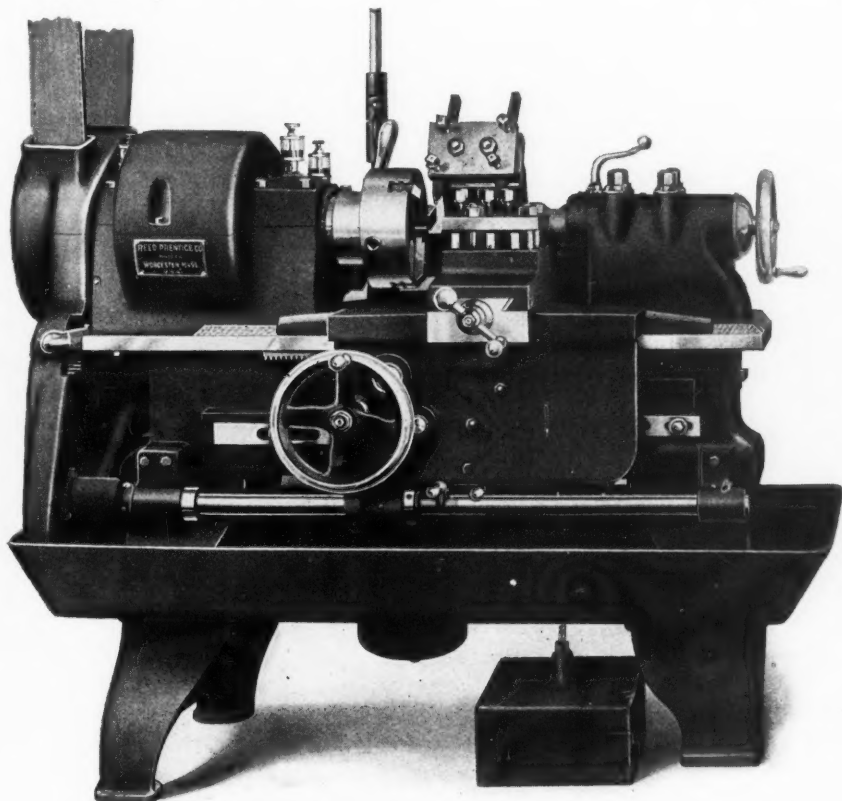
Reed-Prentice Automatic Lathe for turning and facing Forgings and Castings
